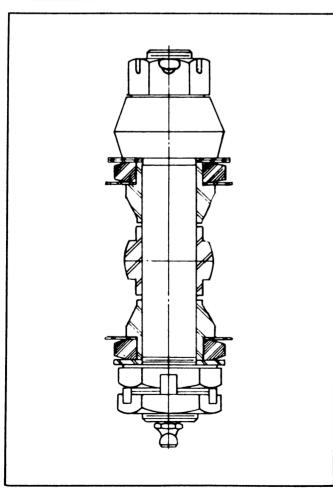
CROSS SECTION OF STUD ASSEMBLY
